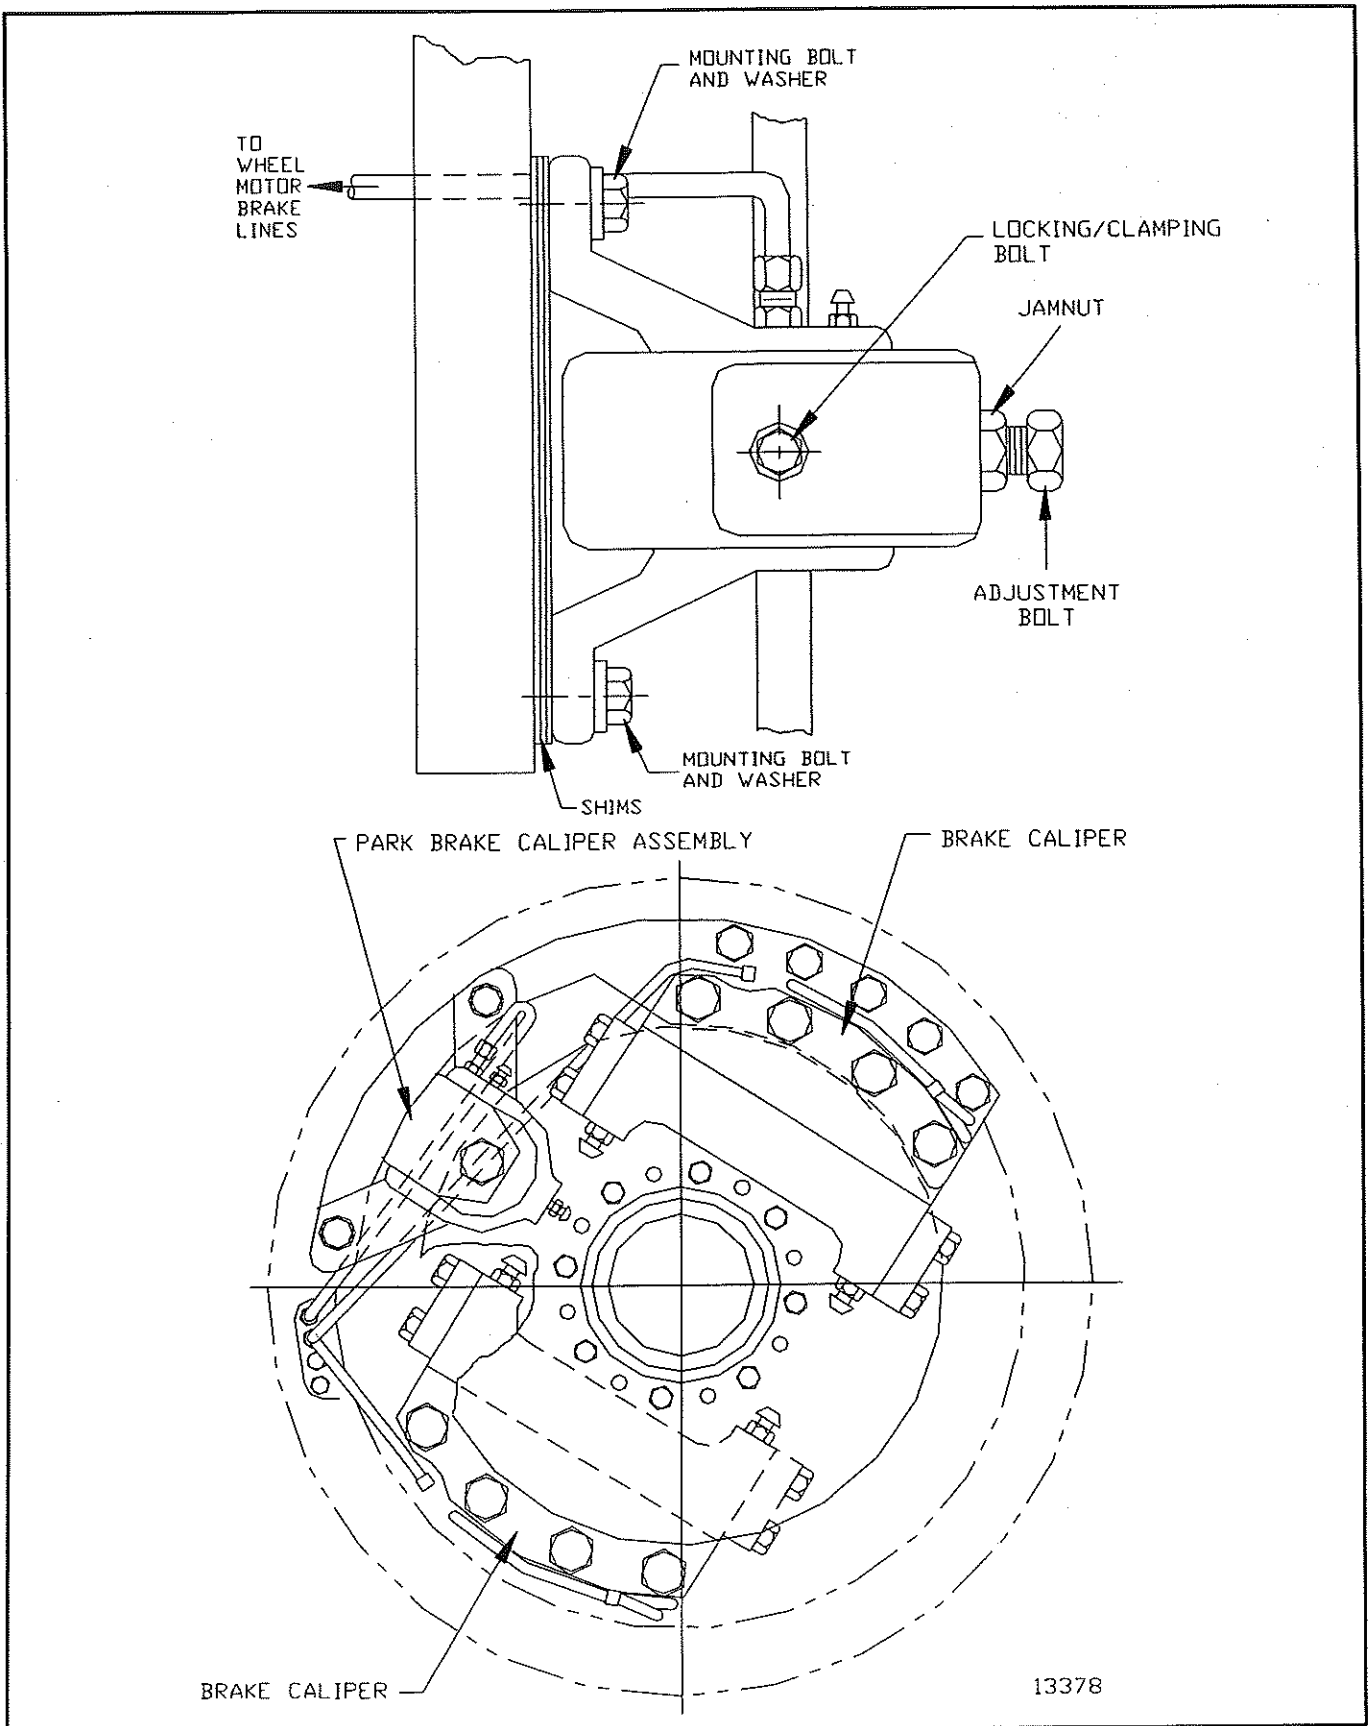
PARK BRAKE CALIPER INSTALLATION AND ADJUSTMENT
